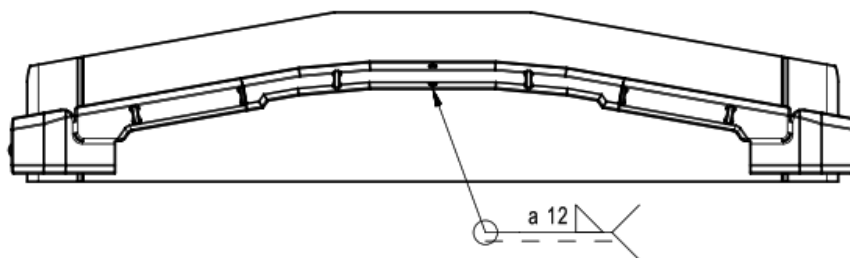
Weld size and annotation (image for reference purposes only).
